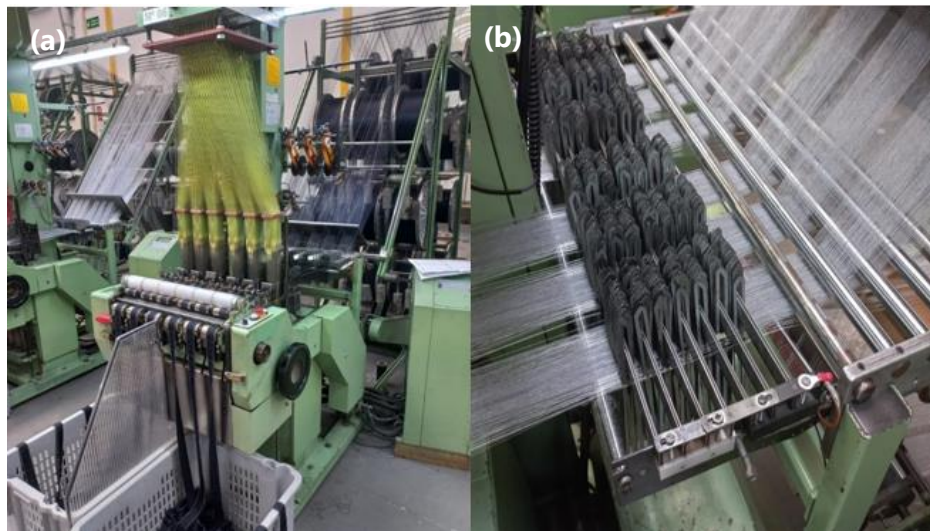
Weaving machine in IMPETUS (a) and the wire healds used (b).
